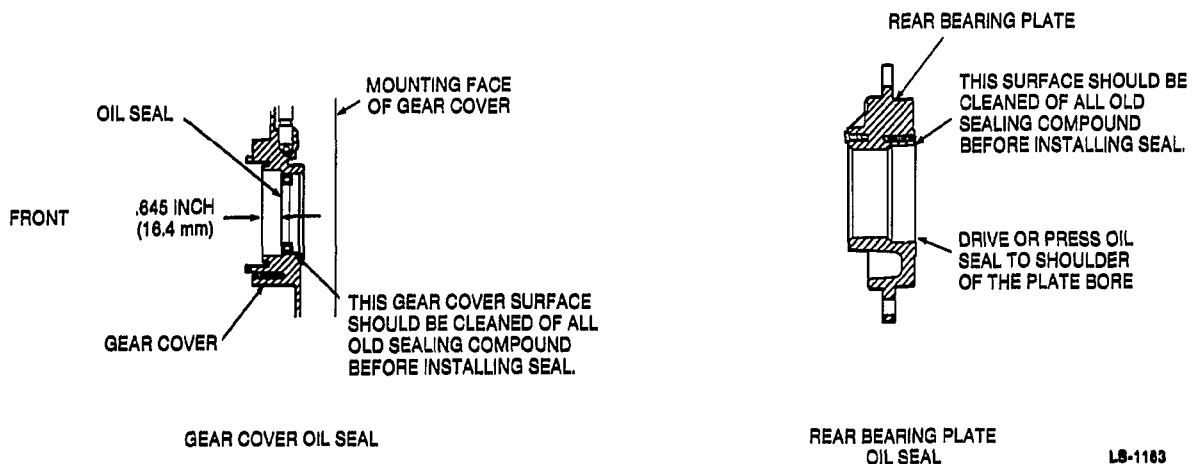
GEAR COVER AND REAR BEARING PLATE OIL SEALS
